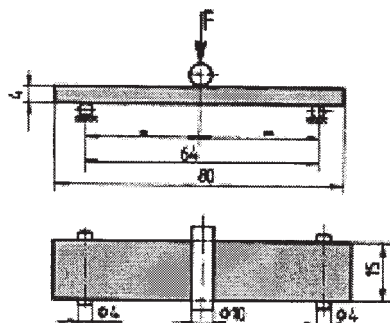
Dimensions of the specimen and scheme of loading for the bending test
